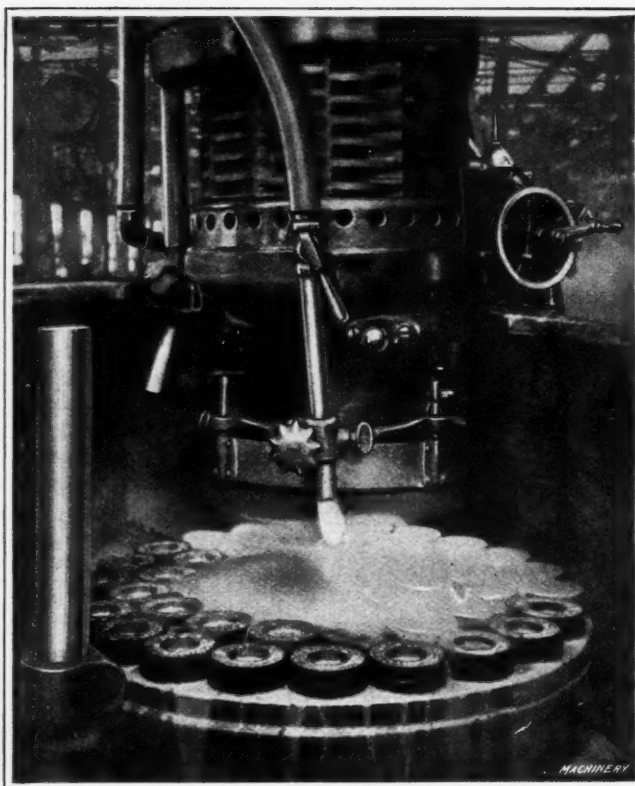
Delivering Coolant to Wheel on Blanchard Surface Grinder
